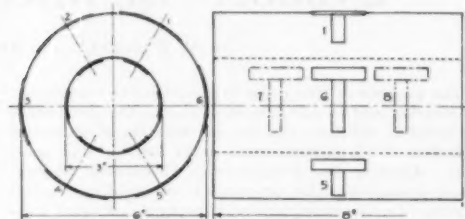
TEST CYLINDER SHOWING GAGE LOCATIONS
